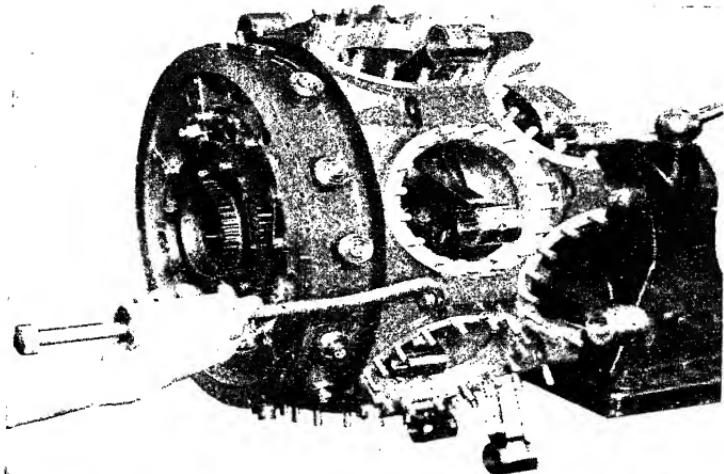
Puller for removing bolts. Notice special bench stand for crankcase.
